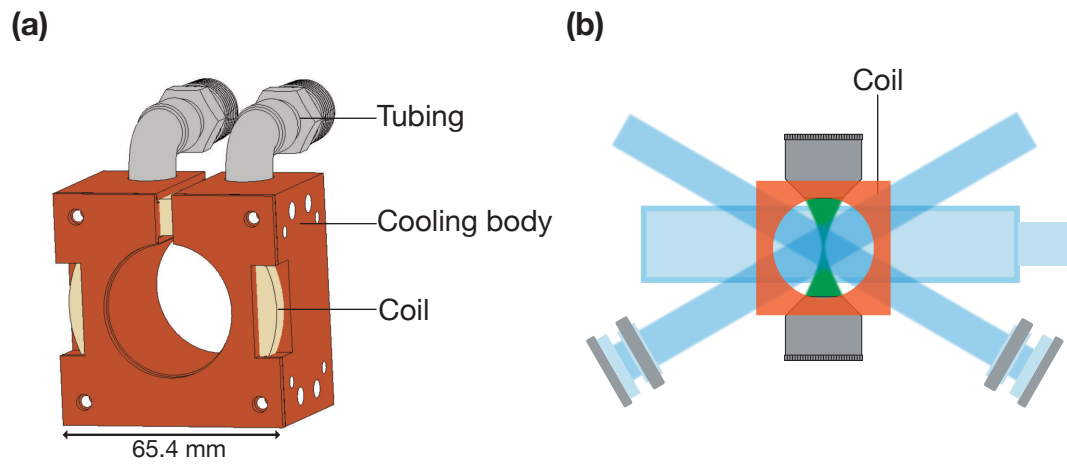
(a) Drawing of the copper holder with the inserted coil. (b) Coil included in the optical layout.
